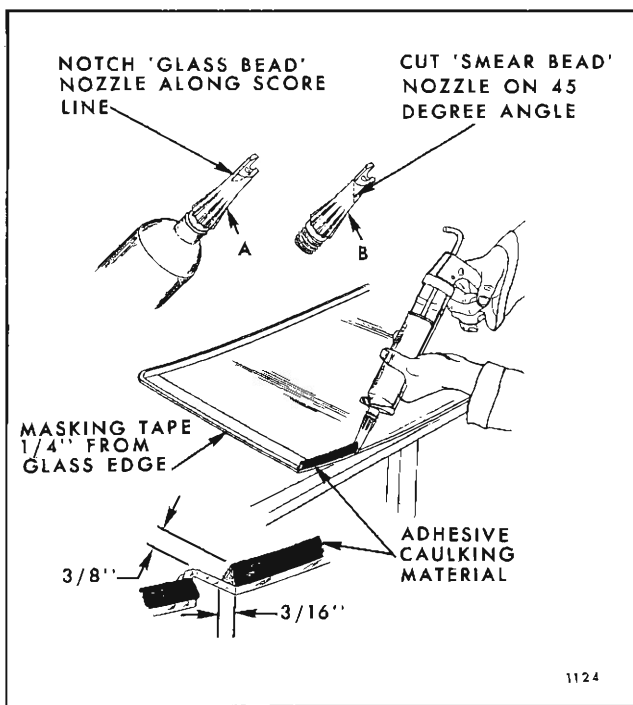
F5—Adhesive Caulking Material Application - Extended Method
